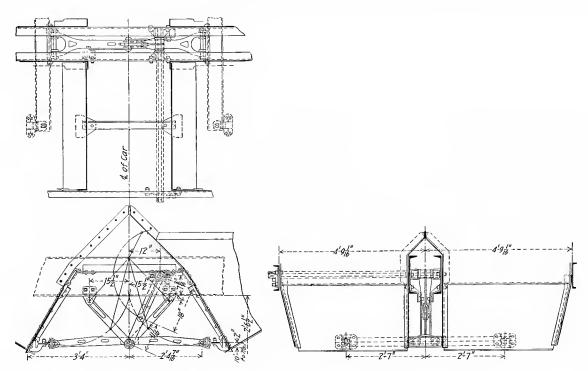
Hopper Door Operating Apparatus. Standard Steel Car Company.
